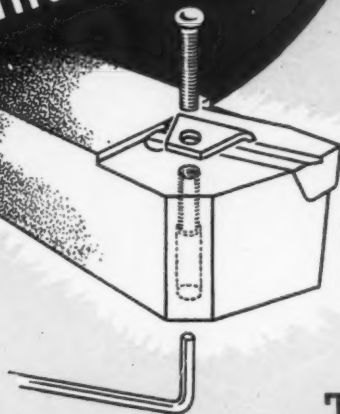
Jig for Use in Grinding Blades of Cutter Shown in Fig. 1
